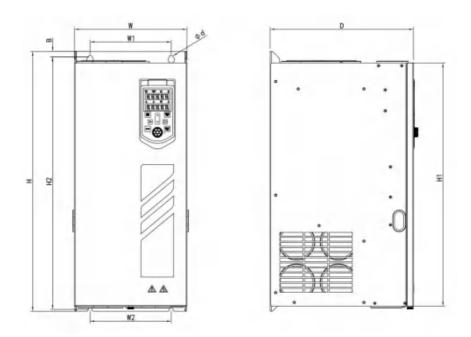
Overall dimensions of PV300-1T(0.75kW~1.5kW)、 PV300-2S/2T(0.75kW~2.2kW)
